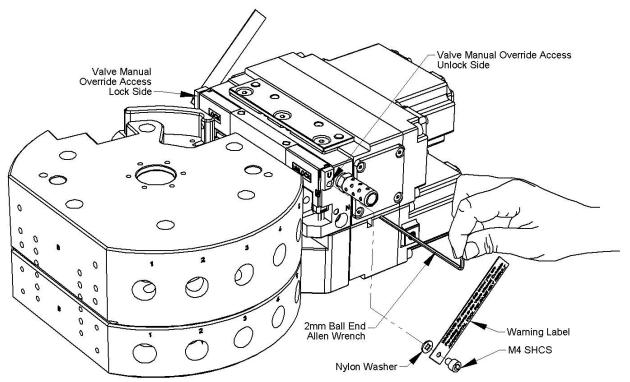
Solenoid Valve Manual Override (JT110-M Shown)
